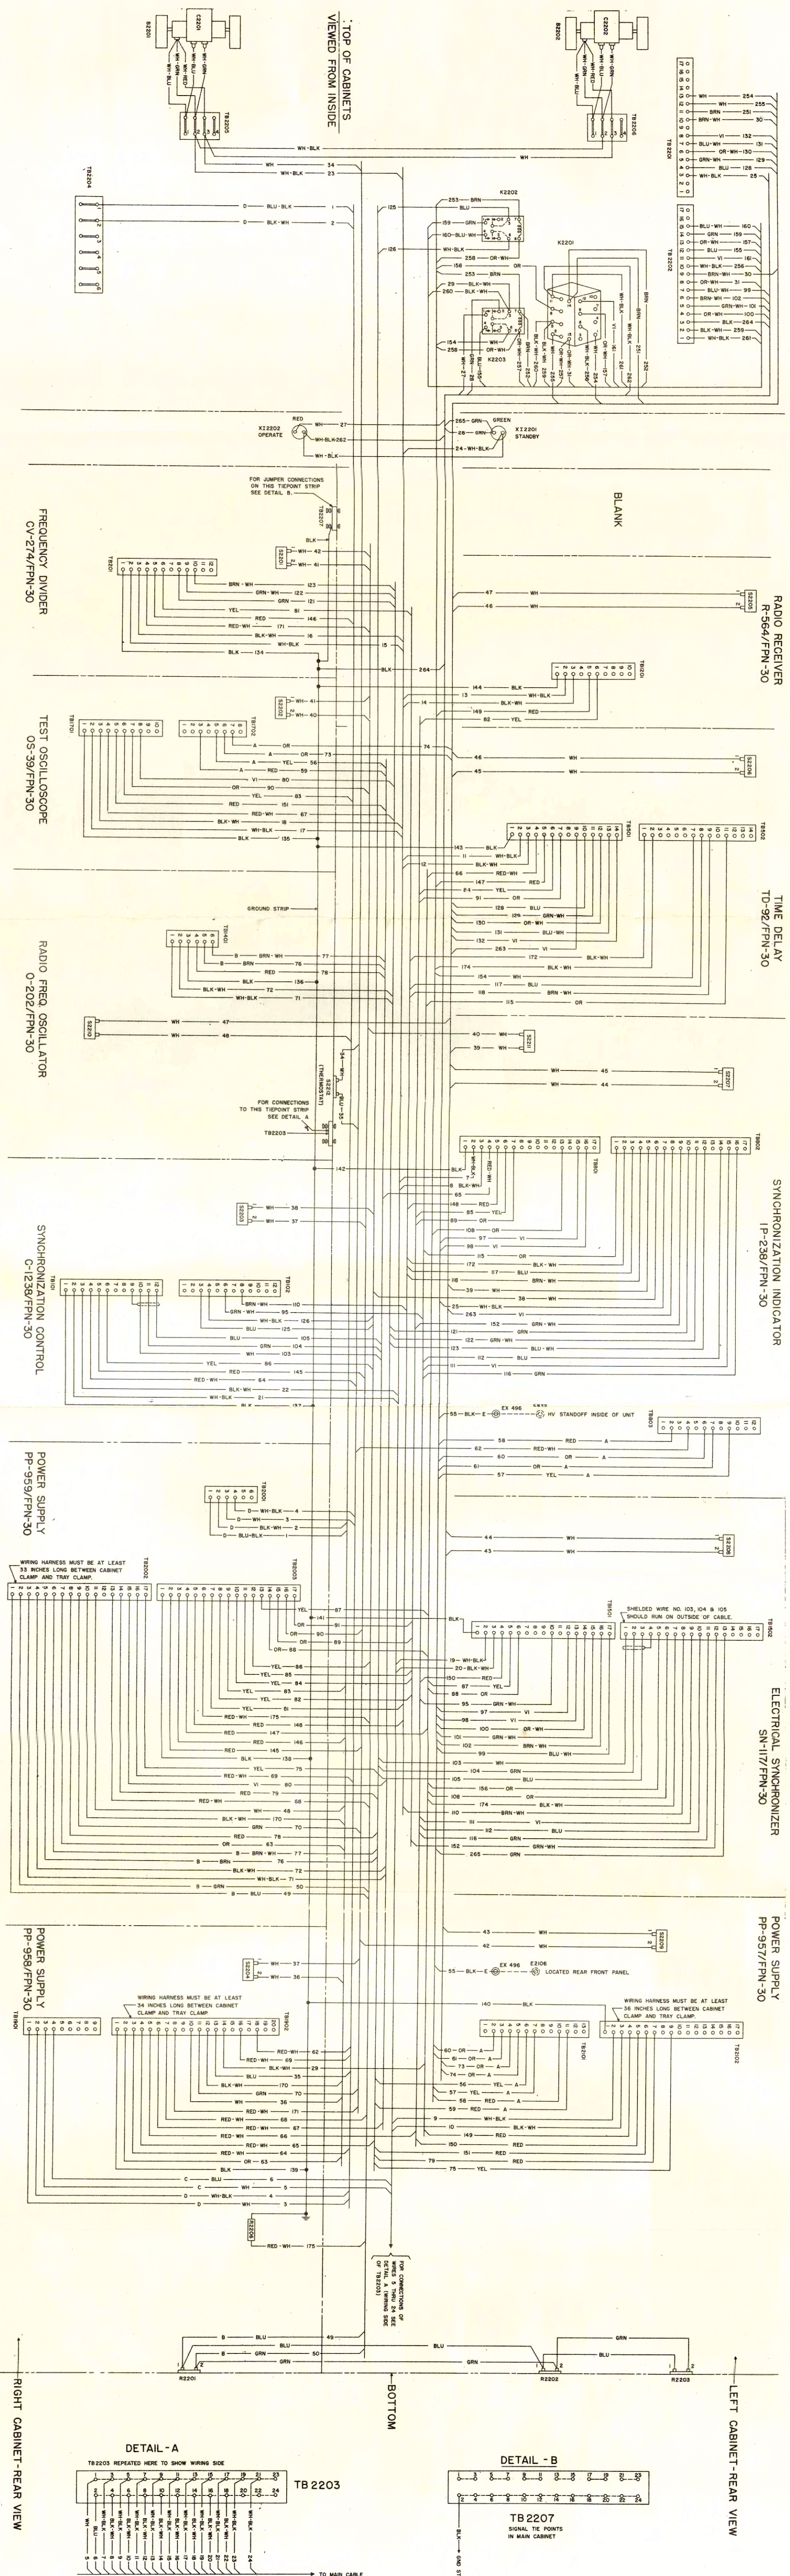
Power Supply Type PP-957/FPN-30, Wiring Diagram
